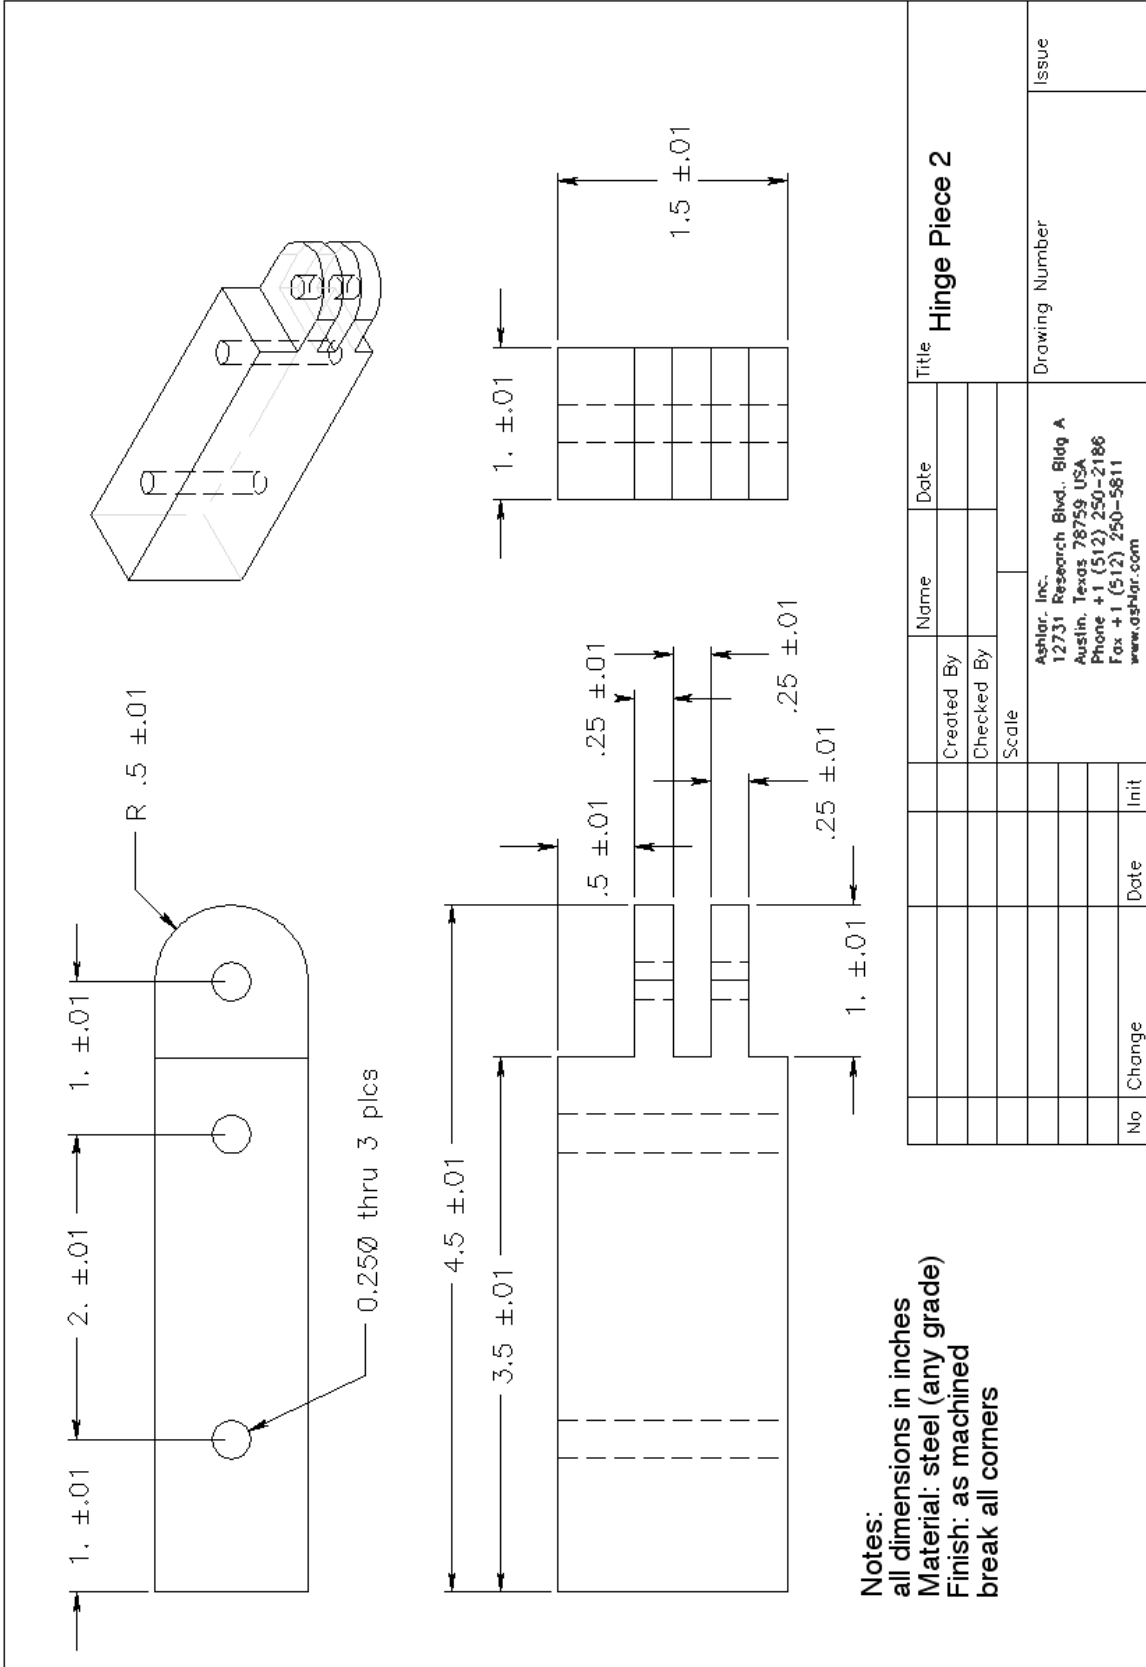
Drawing of Artificial Crack System Hinge Piece 2.
